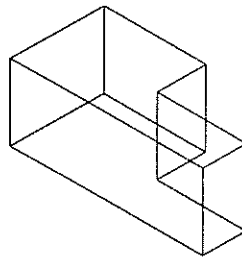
Isometric view of the extrude solid constructed from the resolved sketch
